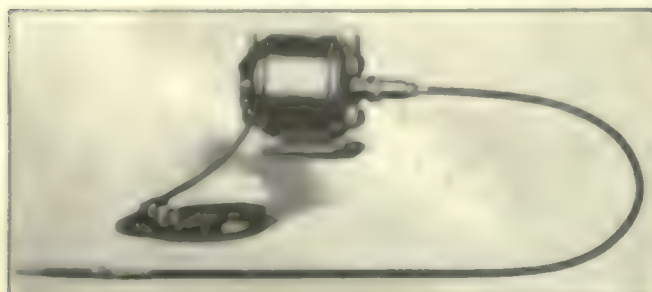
WHITE TYPE W PORTABLE ELECTRIC-DRIVEN FLEXIBLE-SHAFT EQUIPMENT
